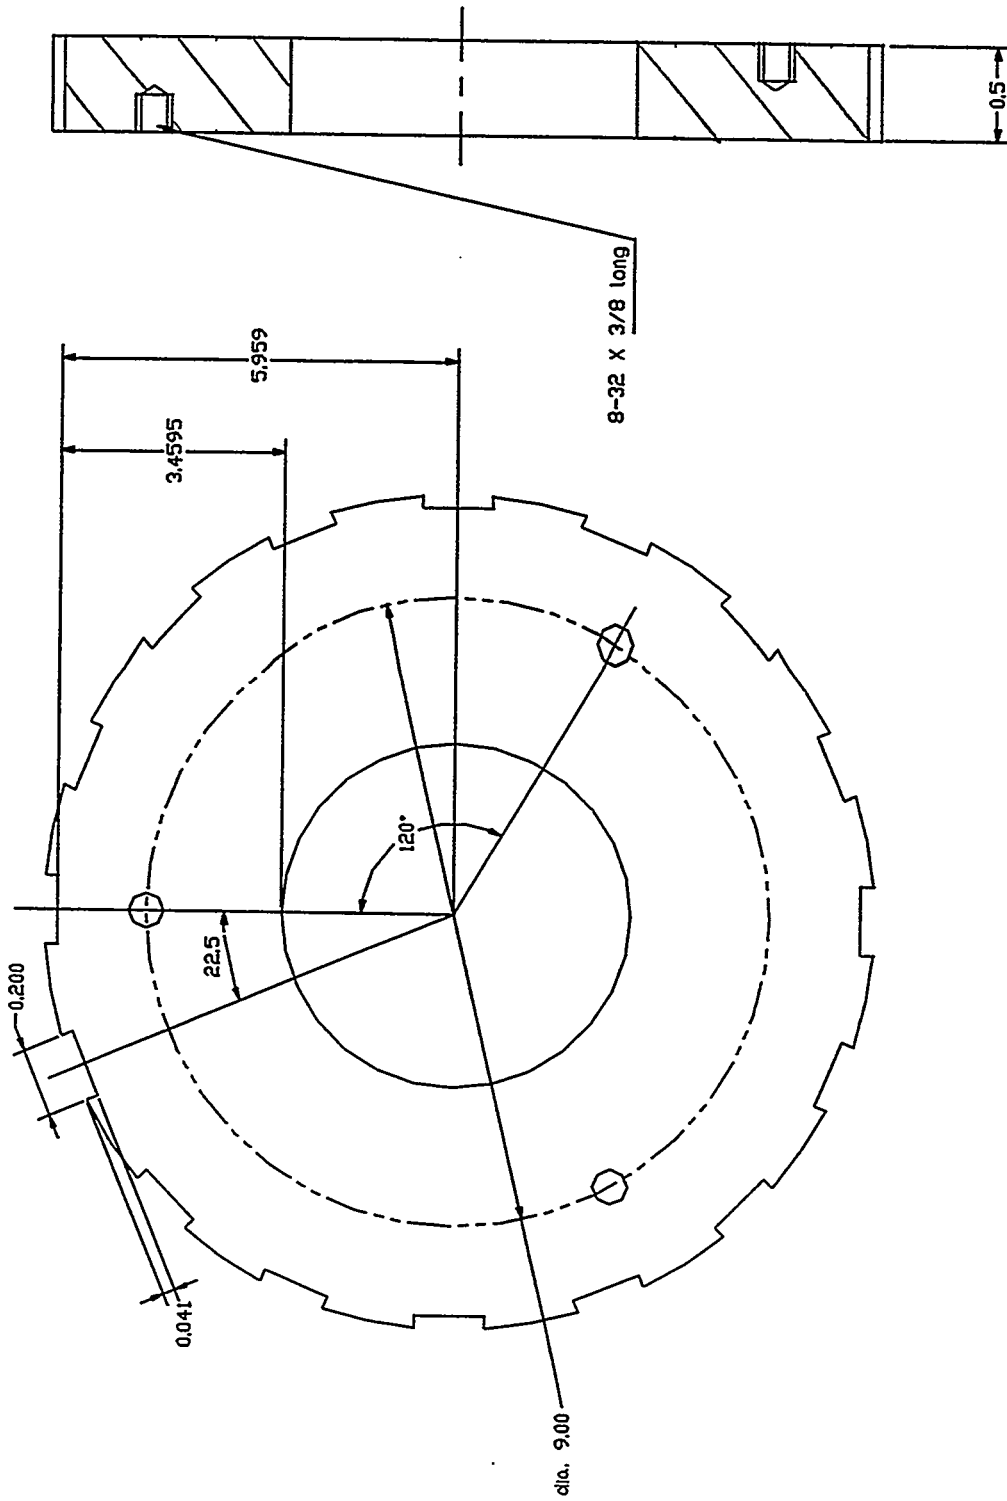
Aluminum disc (wheel core) for mounting sensors
